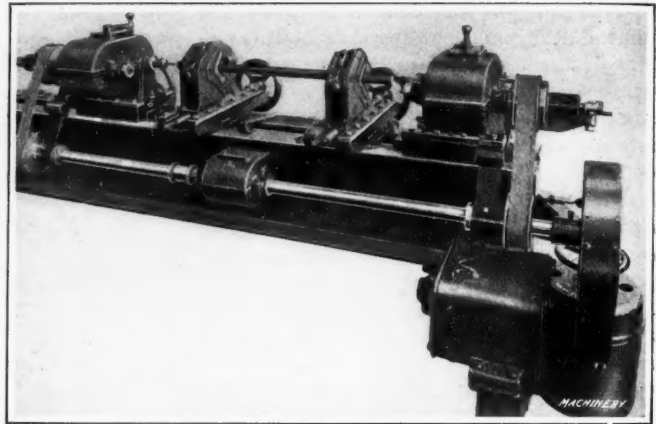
Close View of Pawling & Harnischfeger Centering Machine working on Shaft $1\frac{1}{8}$ Inch in Diameter by 30 Inches Long
